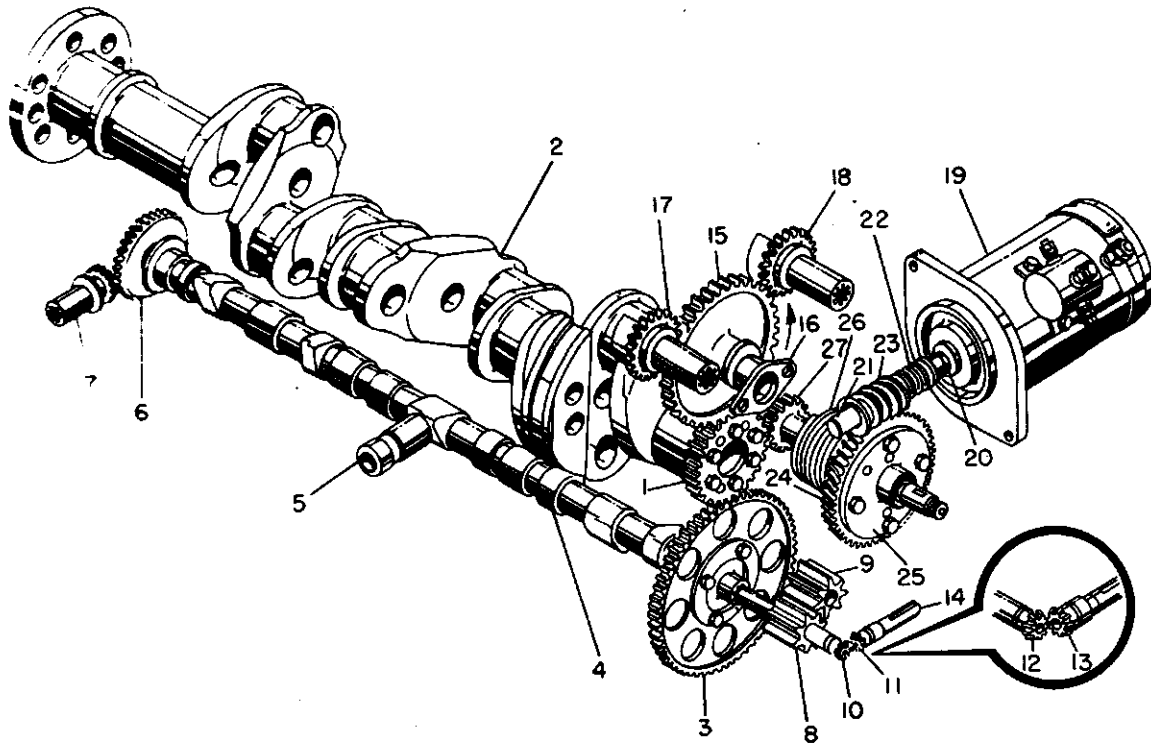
Features of No. 534320-A1 Crankshaft Assembly
